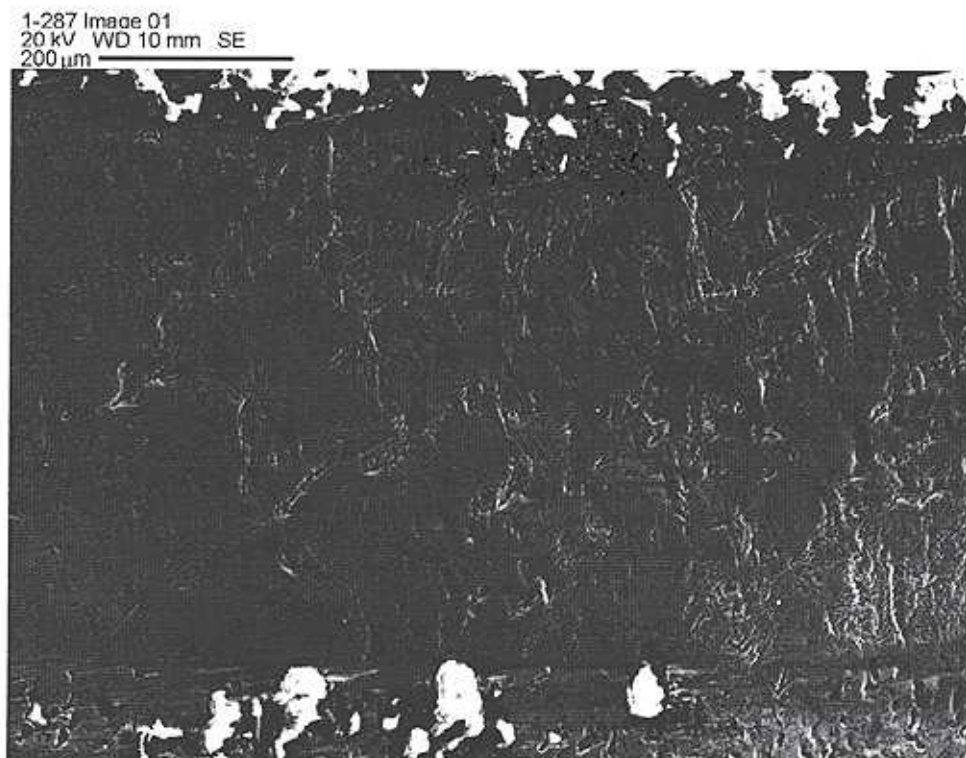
287 Hole 1 Surface ripples on the plate surface near the hole.
